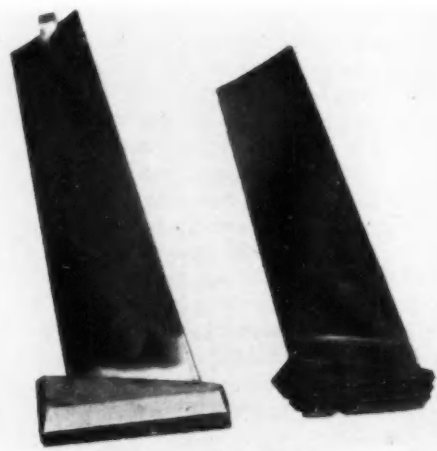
Jet engine compressor blade that has been forged to size on the airfoil and machined to size on the dovetail
